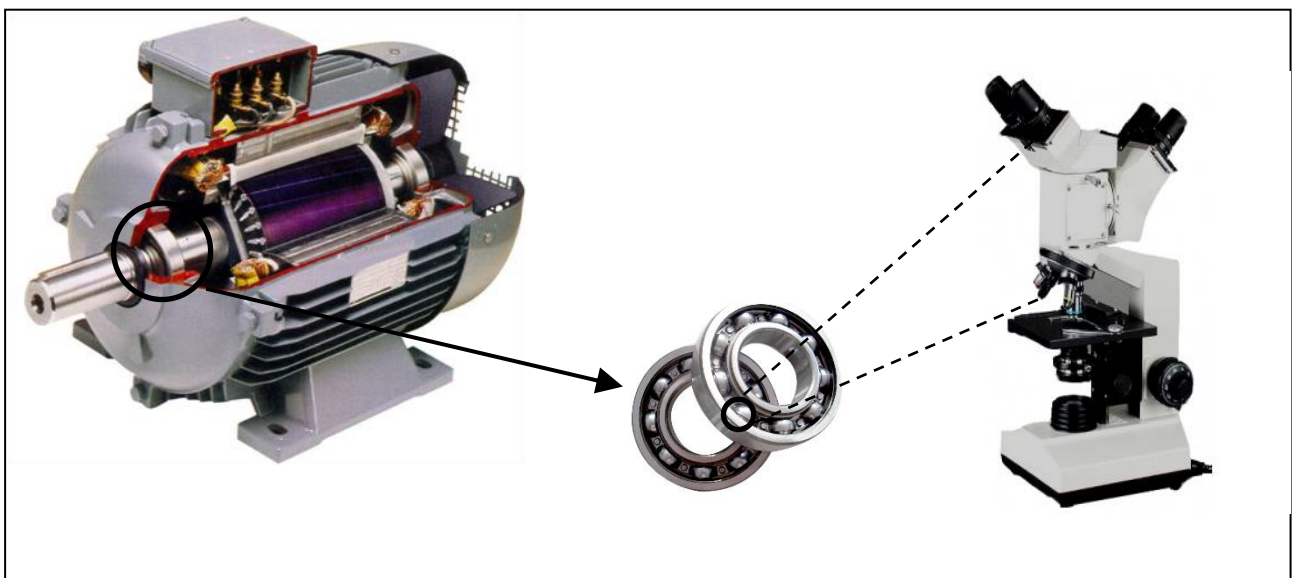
Analysing an AC Motor Deep Groove Ball Bearing
